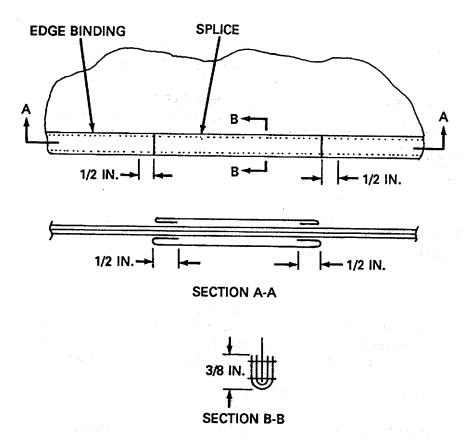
Deployment Bag Edge Binding Splicing Details.
